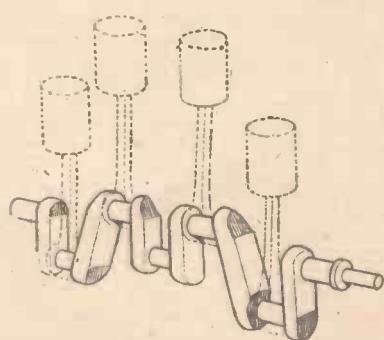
The arrangement of the cranks in a 4-cylinder engine (three-bearing crankshaft).
